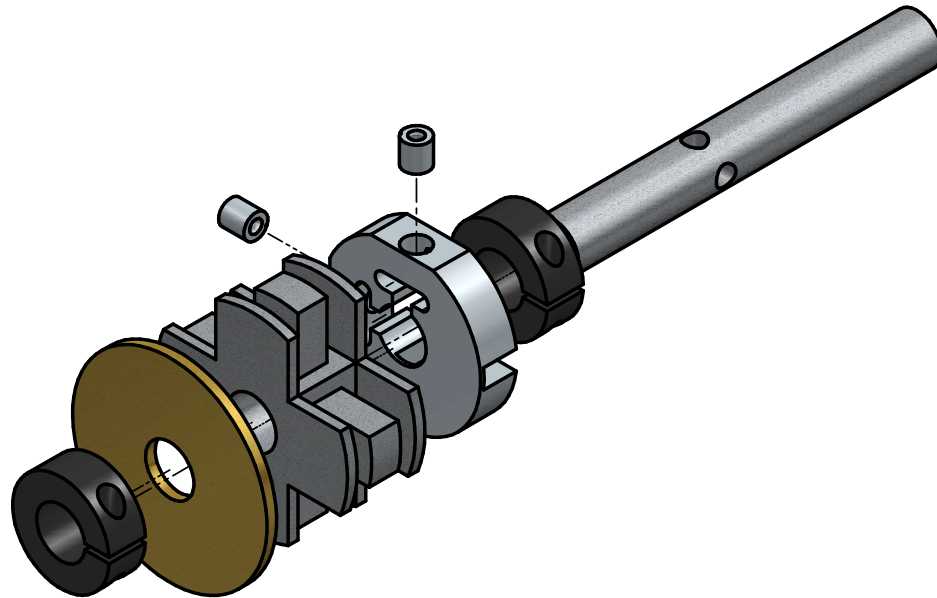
An exploded view of the components mounted on the secondary shaft. From left to right: outer lock ring, brass touchdown disc, magnetic bearing, sensor bracket, inner lock ring.
